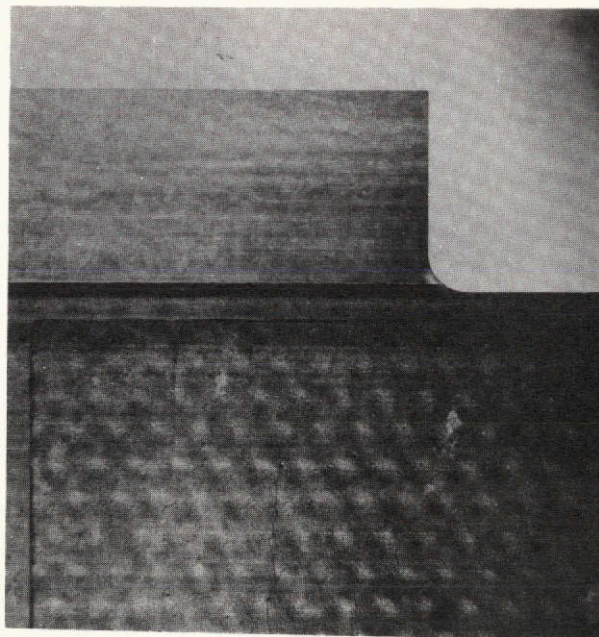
Supplier A Positive Plate Tab and Surrounding Area Showing Borderline of Sintered Portion (2X) (TRW Photo No. 104803-73)
